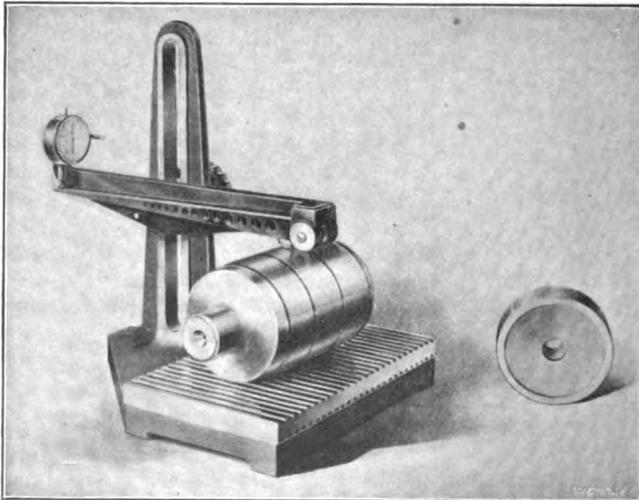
Gage for Testing Outside Diameters of Ball Bearings
